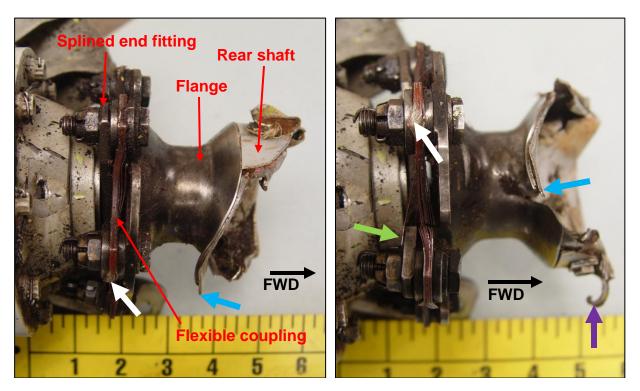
The rear drive shaft connection to the tail gearbox (left) and with the shaft rotated 90-degrees clockwise (right).
